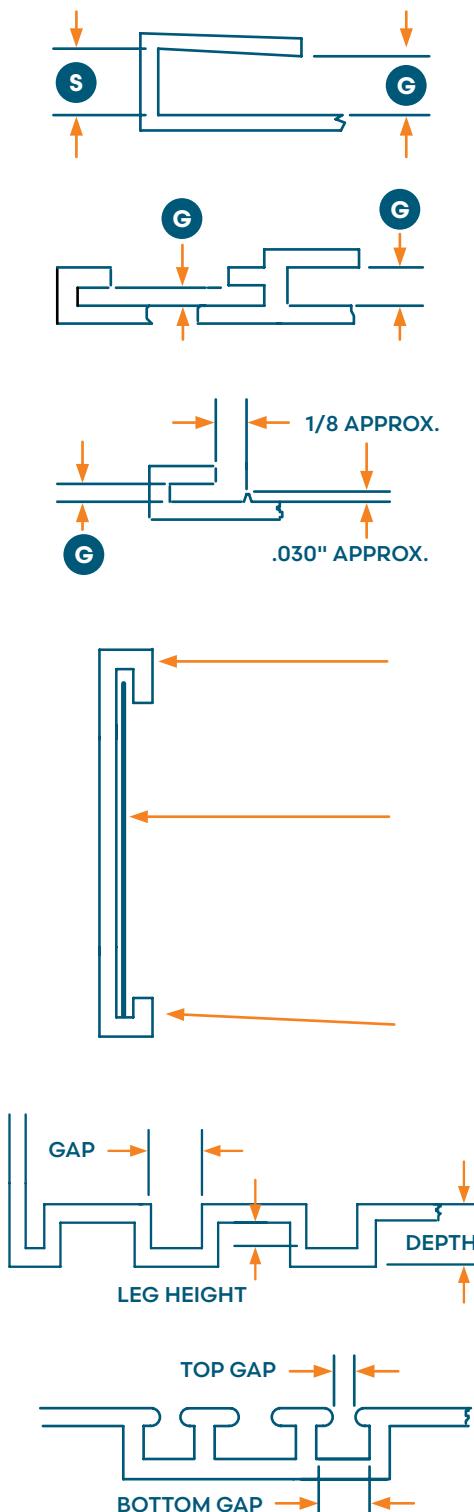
// GAP DESIGNEXAMPLE OF AN ADJUSTABLE GAP
